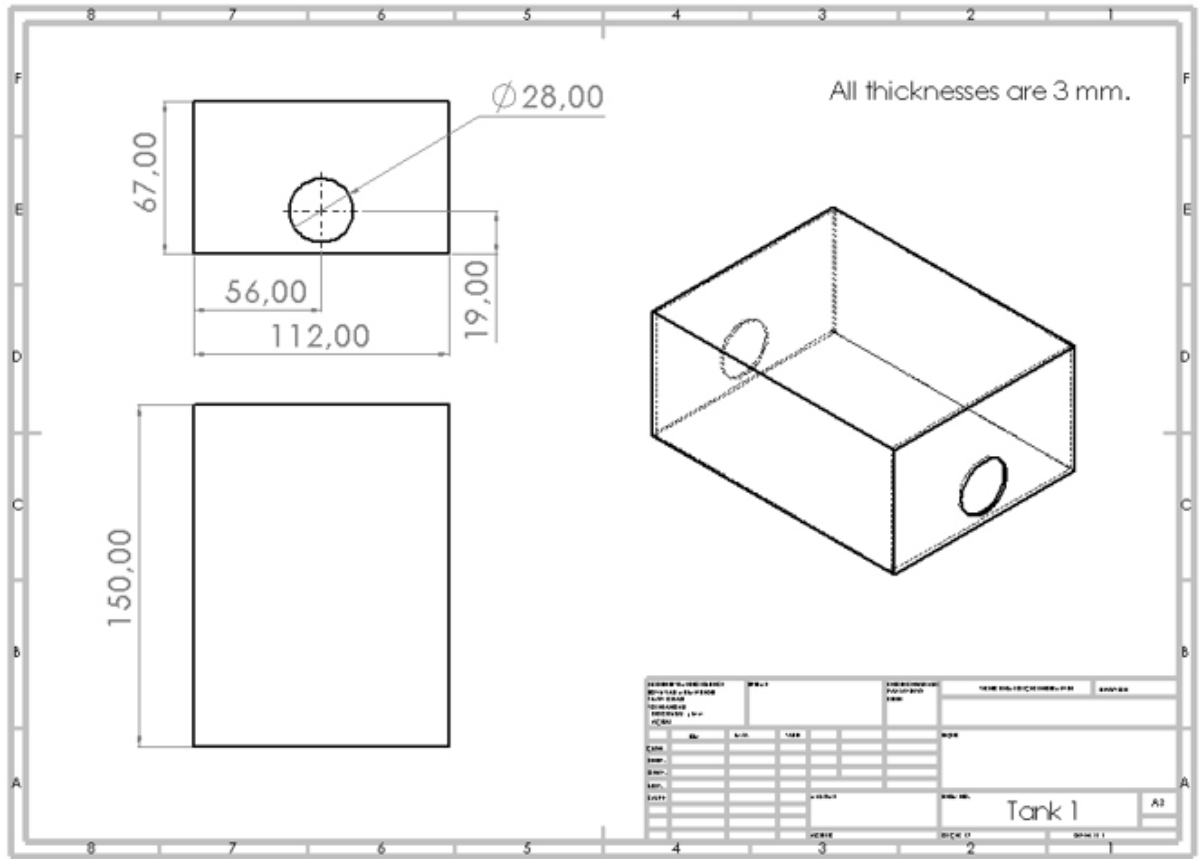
Technical Drawing of Single tube Eccentric Configuration
